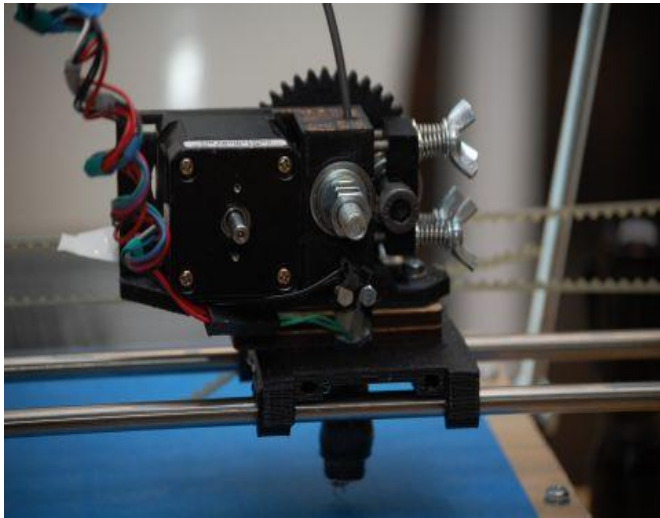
Assembled Wade's geared extruder mounted on the X-carriage
